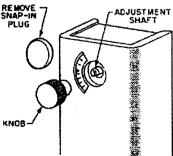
Drawing showing snap-in plug removed and the knob in line to assemble. Press the knob onto the slotted shaft.
